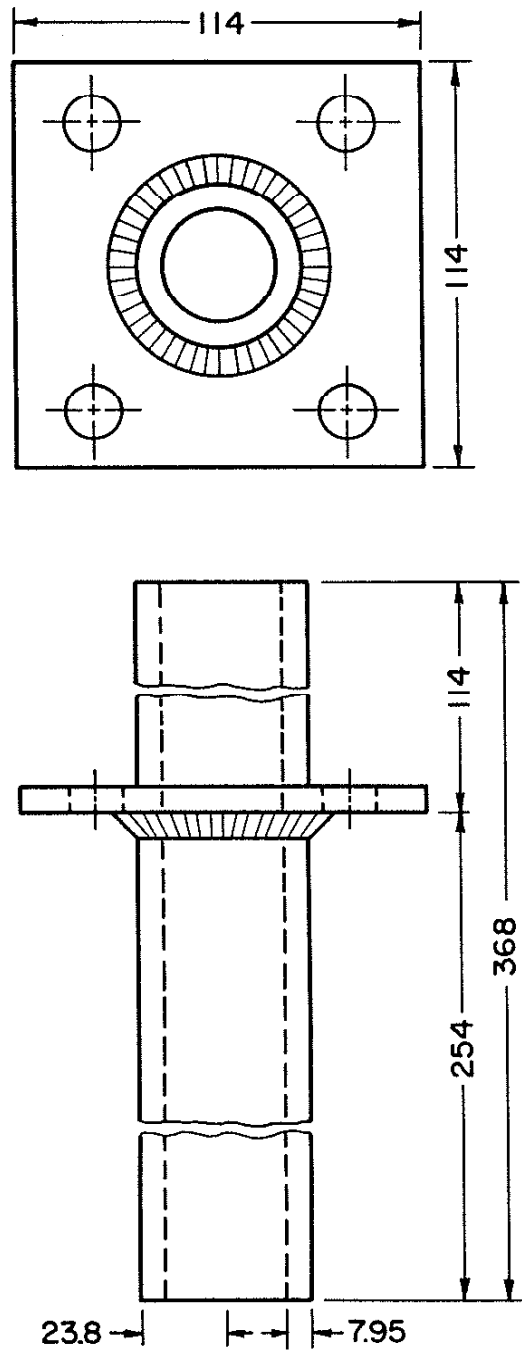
Specimen geometry of tube-to-plate welds (units in mm).
